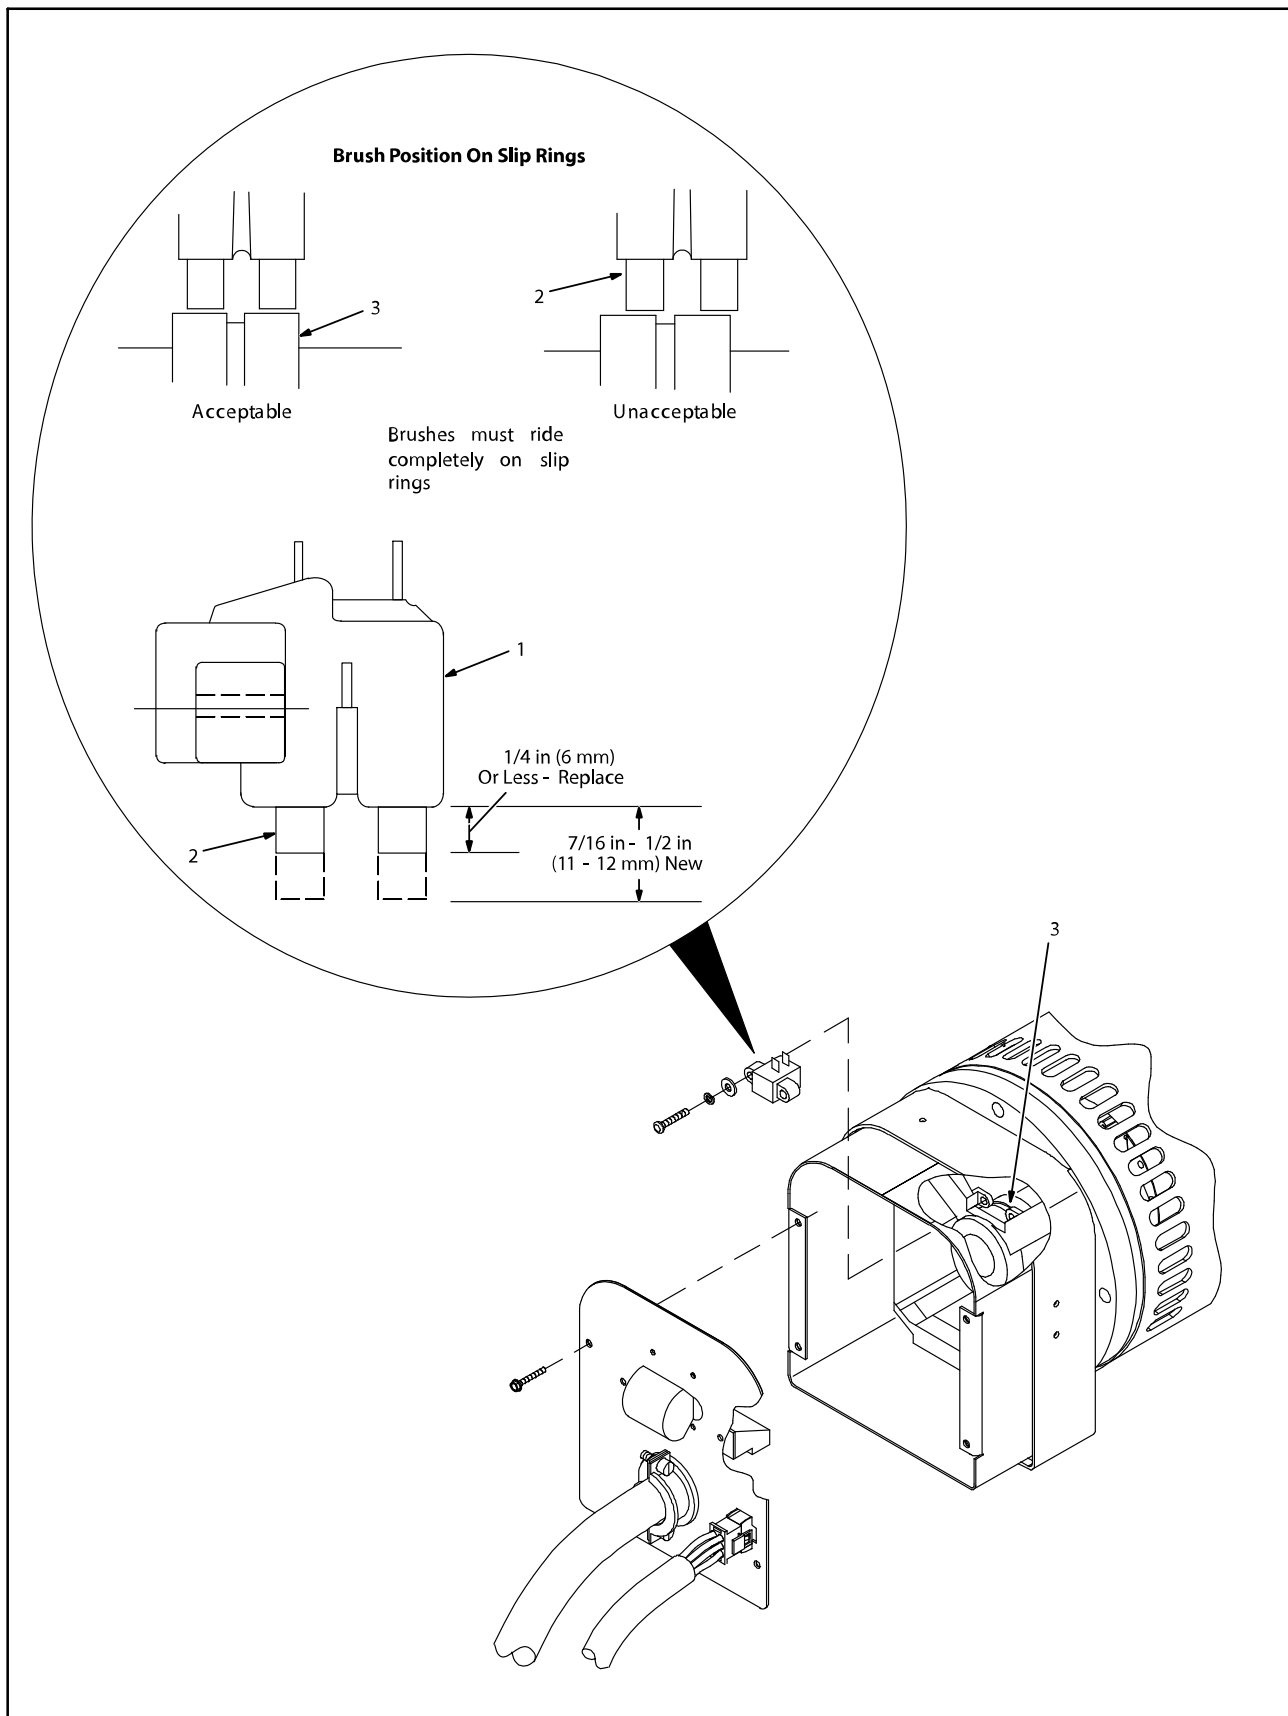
Inspecting Generator Brushes, Replacing Brushes and Cleaning Slip Rings
